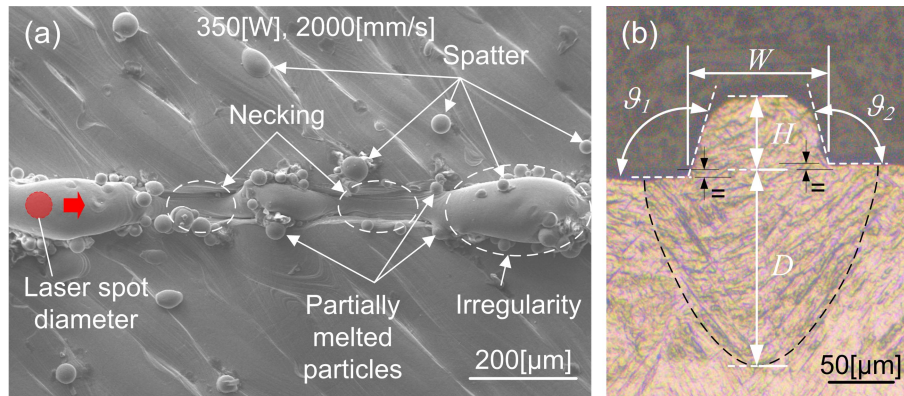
(a) Top view of a single track with typical defects and (b) cross section measurements, where the Heat Affected Zone is also visible [136].
